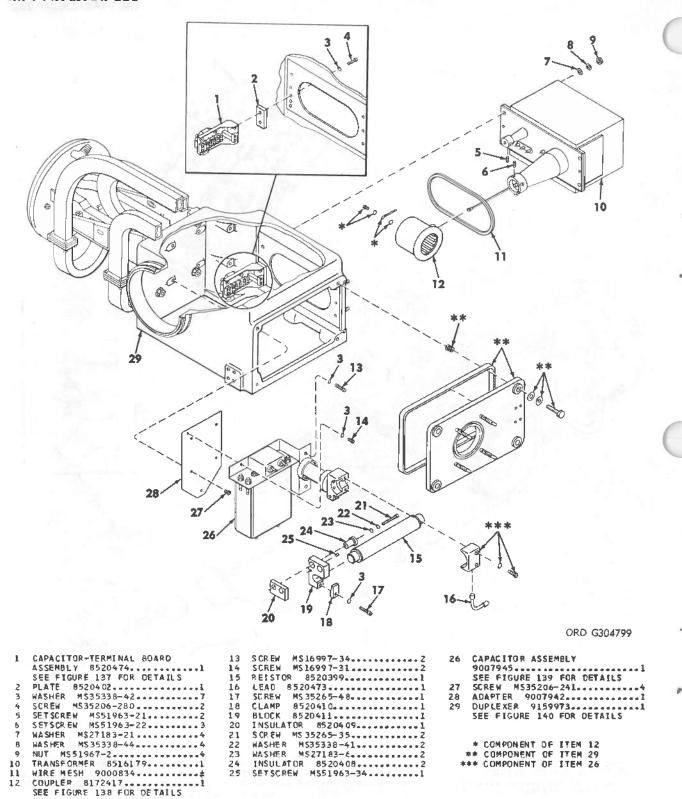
RECEIVER-TRANSMITTER-RADAR SUBASSEMBLY /8172416/-PARTIAL EXPLODED VIEW
